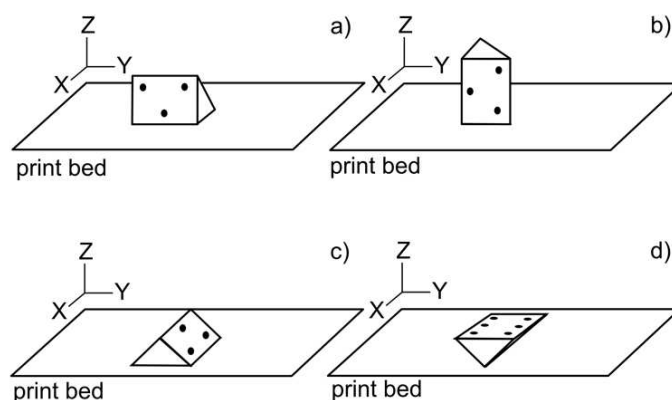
Four possible print-layer orientations for printing the 90° corner brackets used in this work: a) flat, b) tower, c) porous-face-down, and d) porous-face-up.
